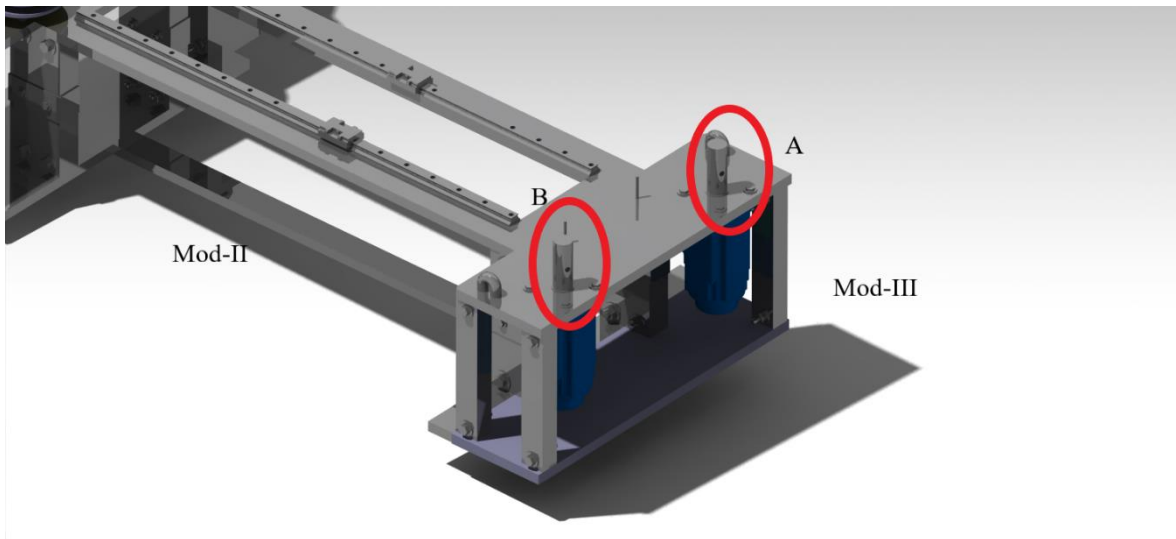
BEARINGS POSITION ON MODULE III (A AND B)
